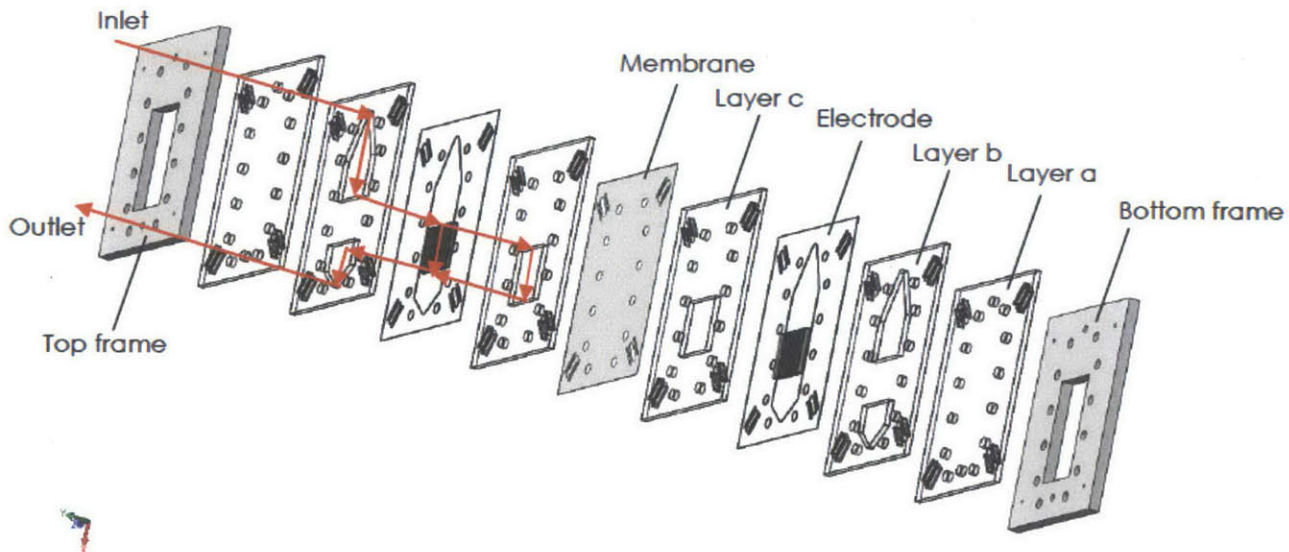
Exploded View of Prototype I, red arrows showing flow path
